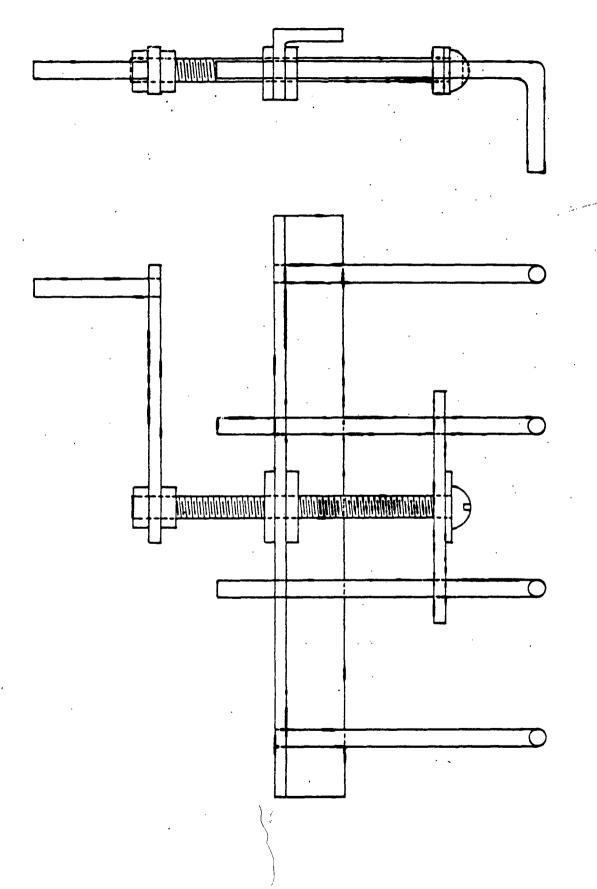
SAMPLE BENDING DEVICE FOR BENT-BEAM STRESS CORROSION SPECIMENS
